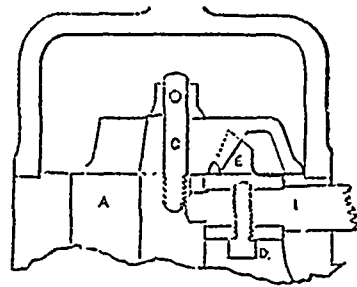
Section of Steam-Chest, showing Steam and Exhaust Pipes.
